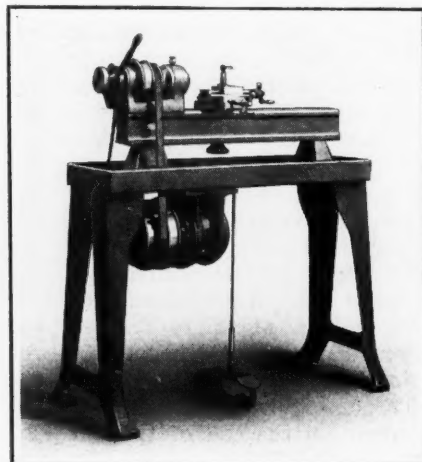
High-speed Lathe with Cone Pulley Mounted on Motor Shaft
